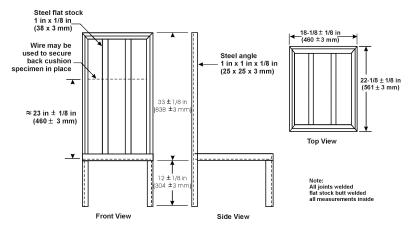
Front, Side, and Top Views of Seat Oil Burner Specimen Frame
